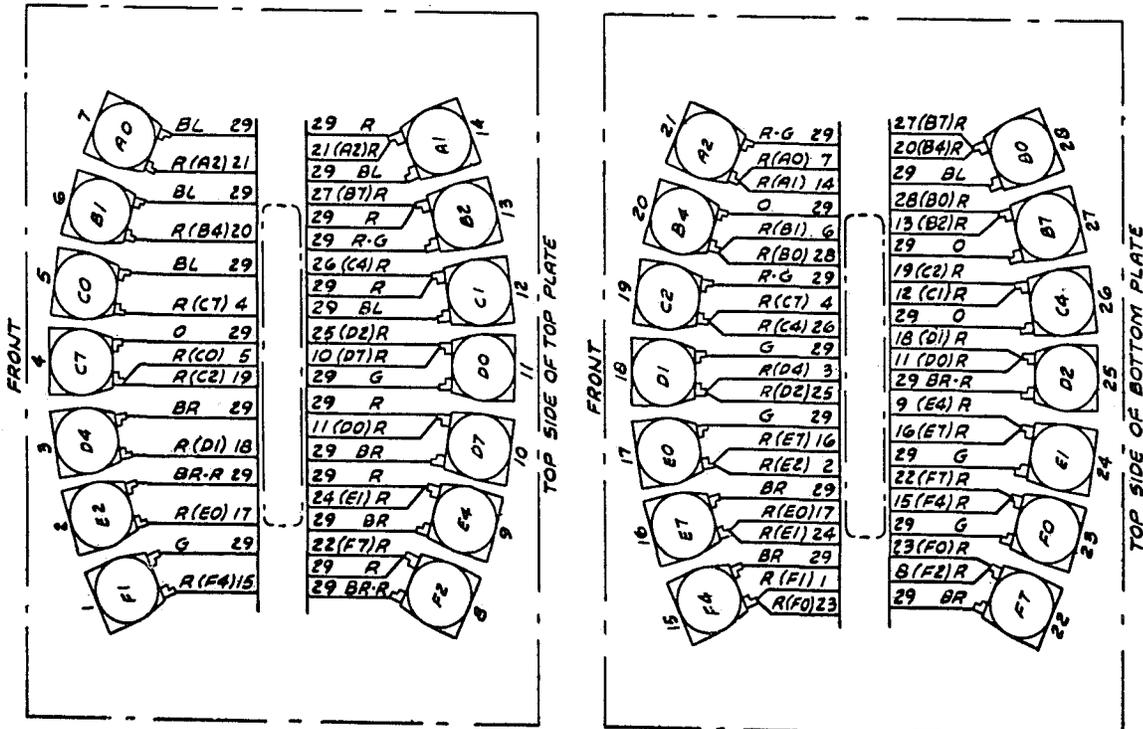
D-176283 Perforator — Wiring Diagram and Perforator Unit Designation
